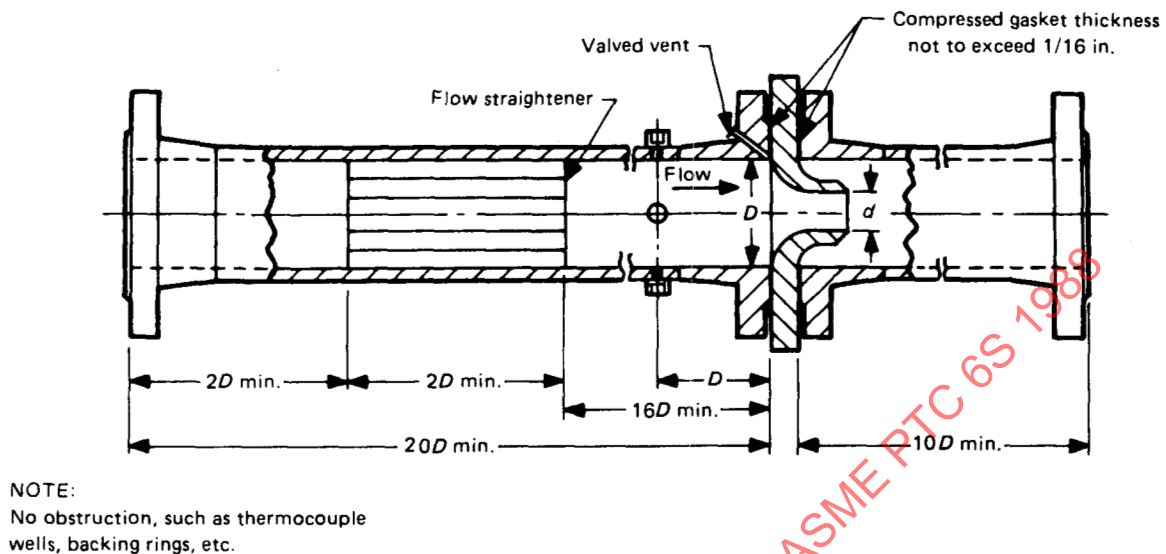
(c) FLANGED PRIMARY FLOW MEASUREMENT SECTION
